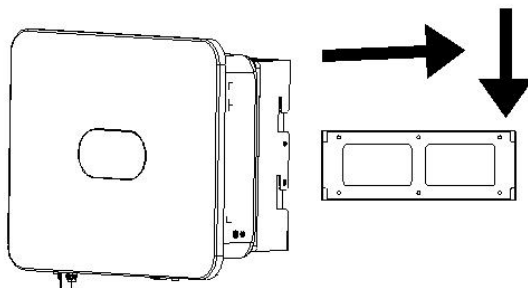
Attach the inverter to the Wall-mounting Bracket
